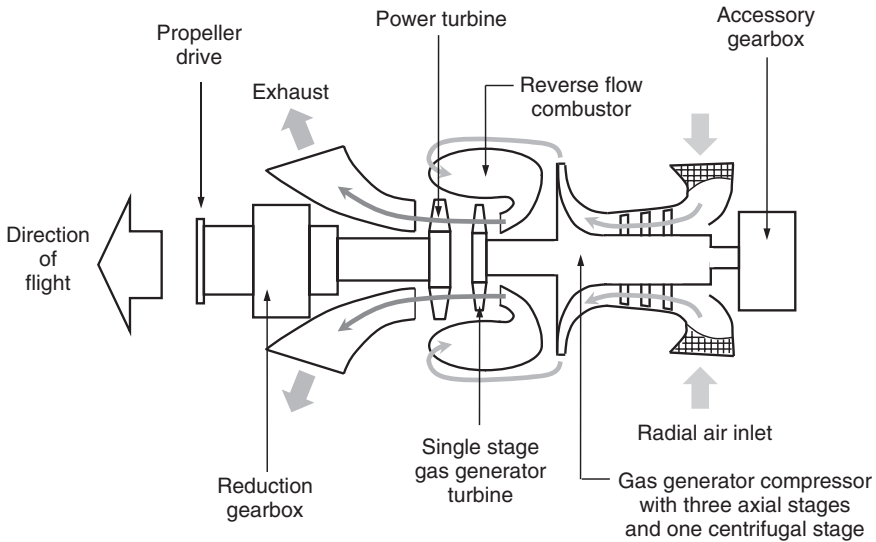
A sectional drawing of the PWA PT-6 turboprop engine.
